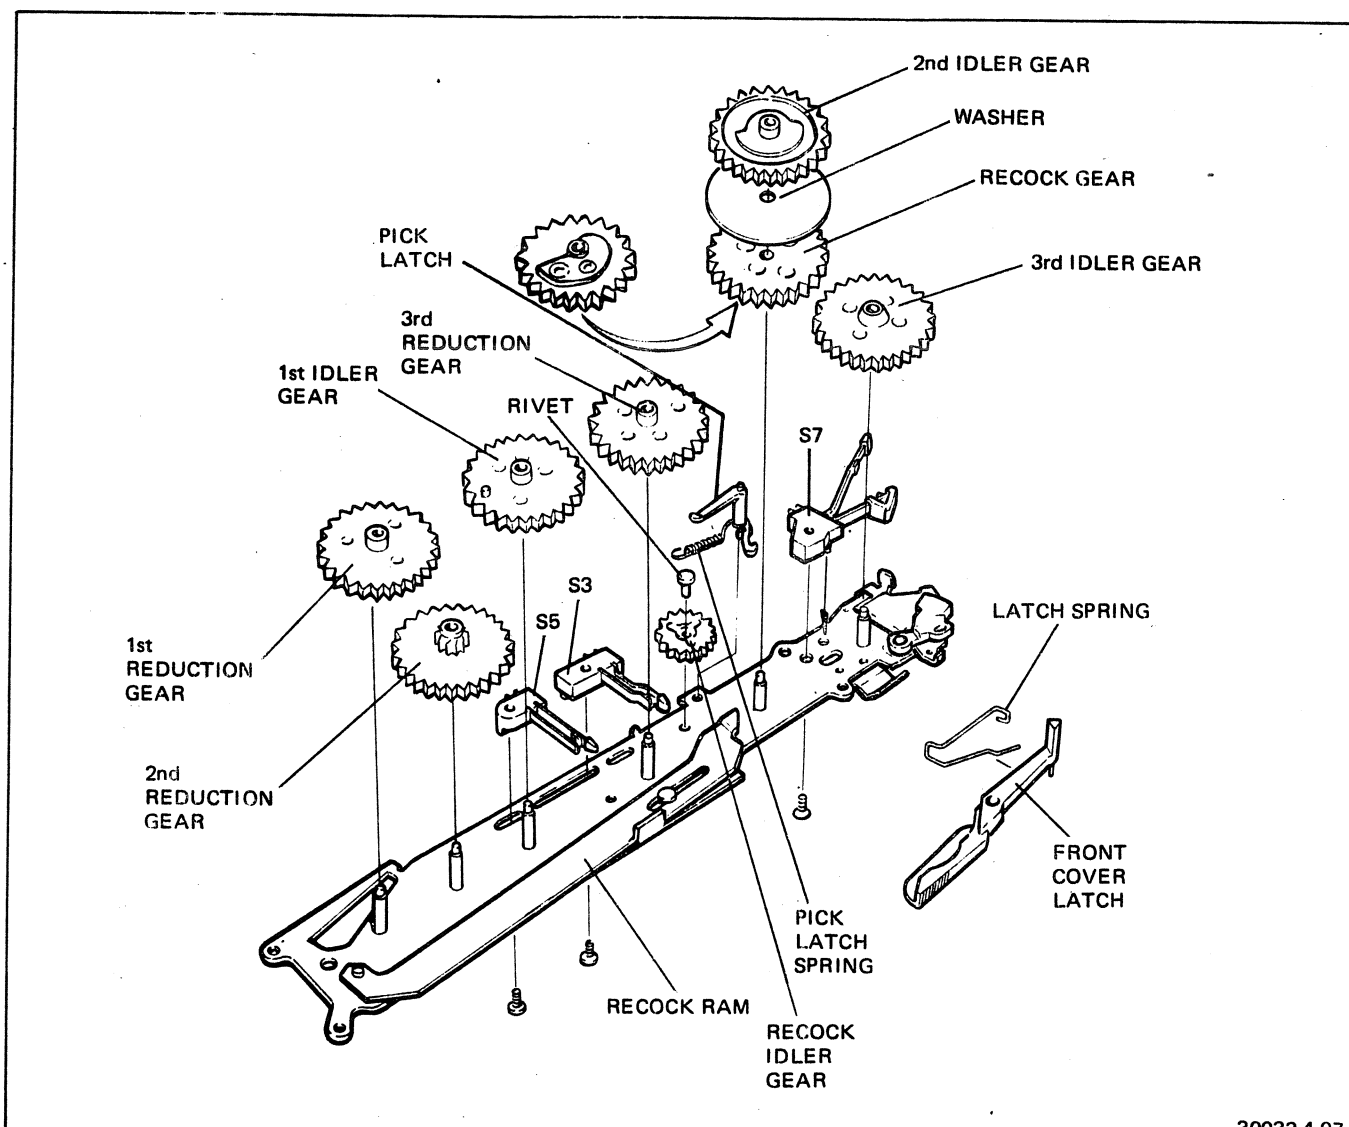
GEAR TRAIN, EXPLODED VIEW
